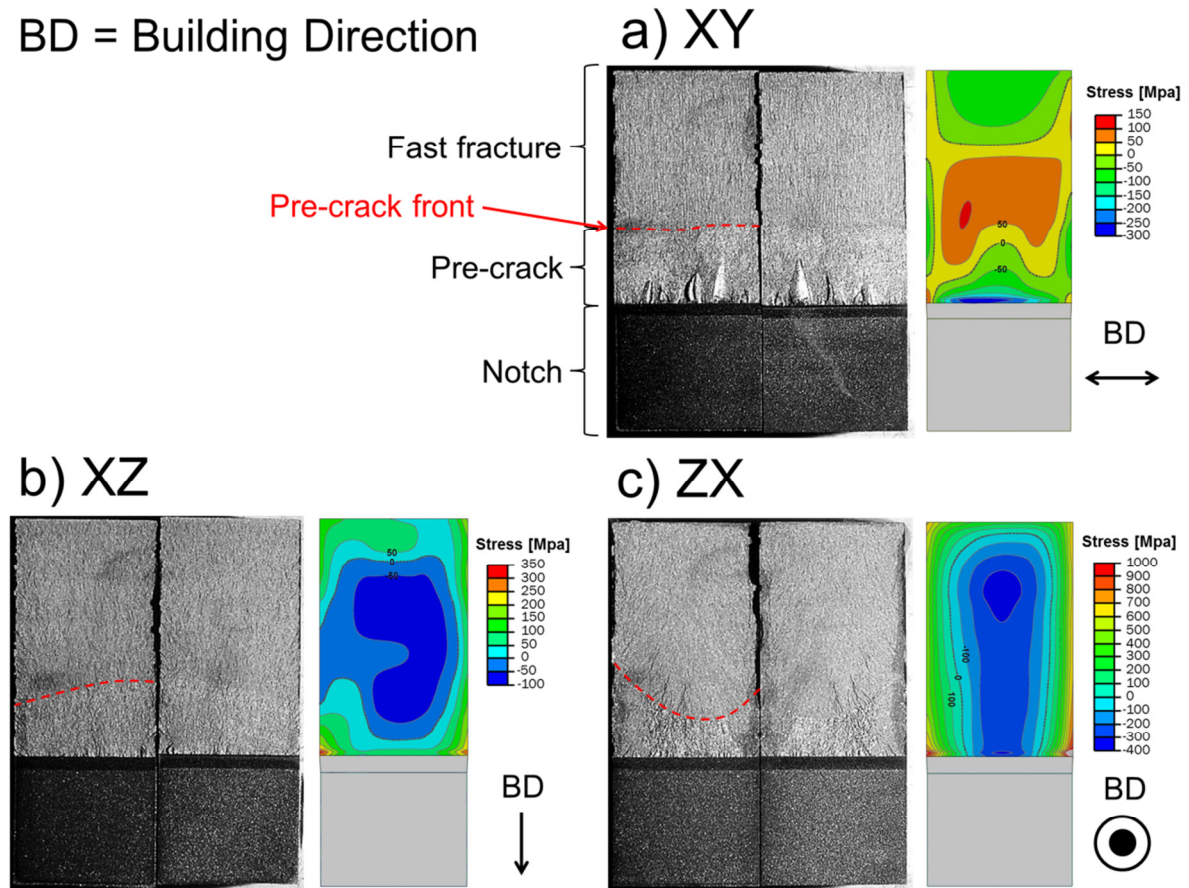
Representative fracture surfaces for all three orientations. The surface shown can be divided in three parts: The notch that was precut using wire EDM and is not an actual part of the fracture surface, the pre-crack and the fast fracture zone. The pre-crack front is indicated by the dashed red line. Also shown are the 2D residual stress plots obtained using the contour method, for a) the XY specimen, b) the XZ specimen and c) the ZX specimen. The stress field in the XY sample shows tension in the center, balanced by compression at the left and right edge. In the XZ and ZX sample, there are compressive stresses in the center and tensile stresses near the top and bottom edges. Notice the different scales; the stresses are much larger in the ZX specimen.
